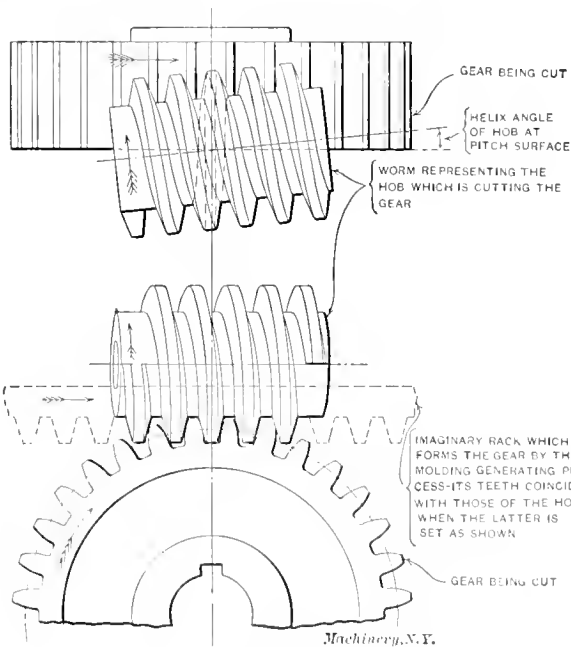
Diagram illustrating the Principle of the Hobbing Process of Forming Spur Gears.
